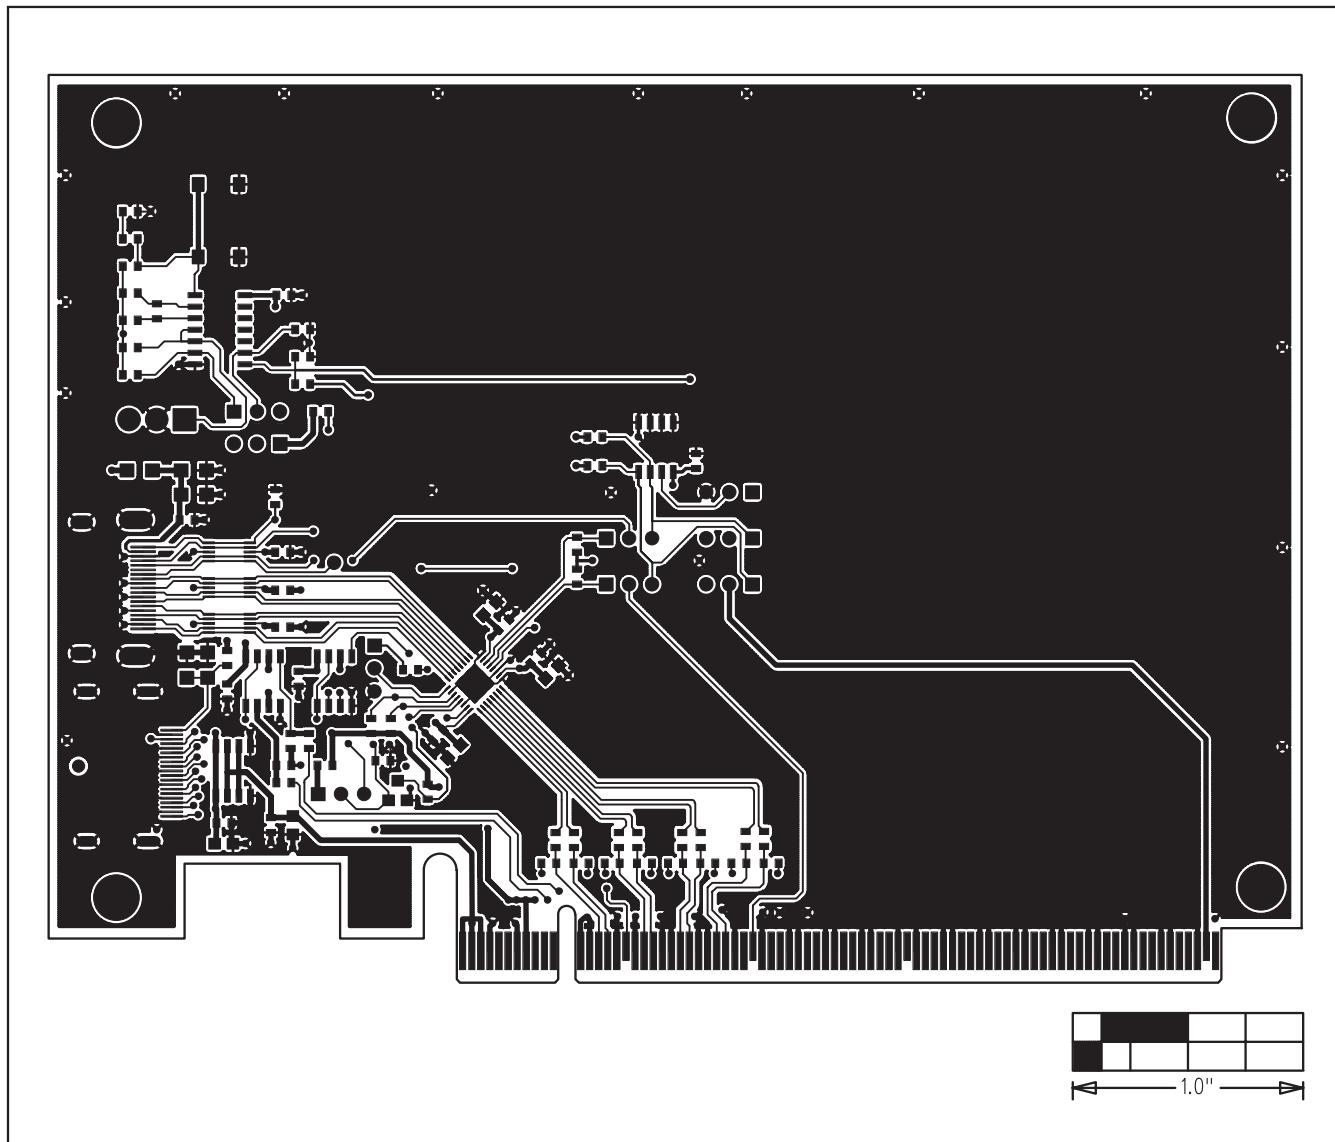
MAX9406 EV Kit PCB Layout—Component Side
